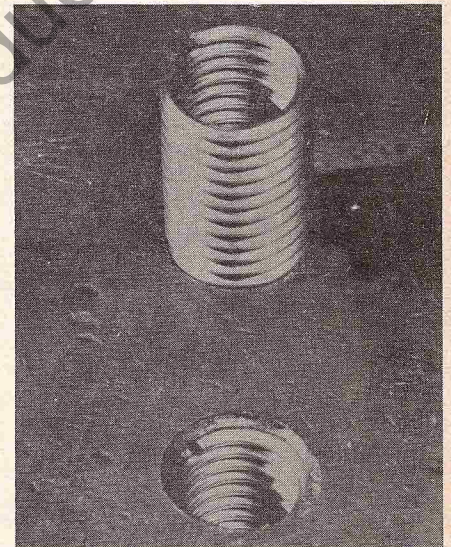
Damaged threads in aluminum casting before repair. (Series provided by Heli-Coil Corp., Danbury, Connecticut).
